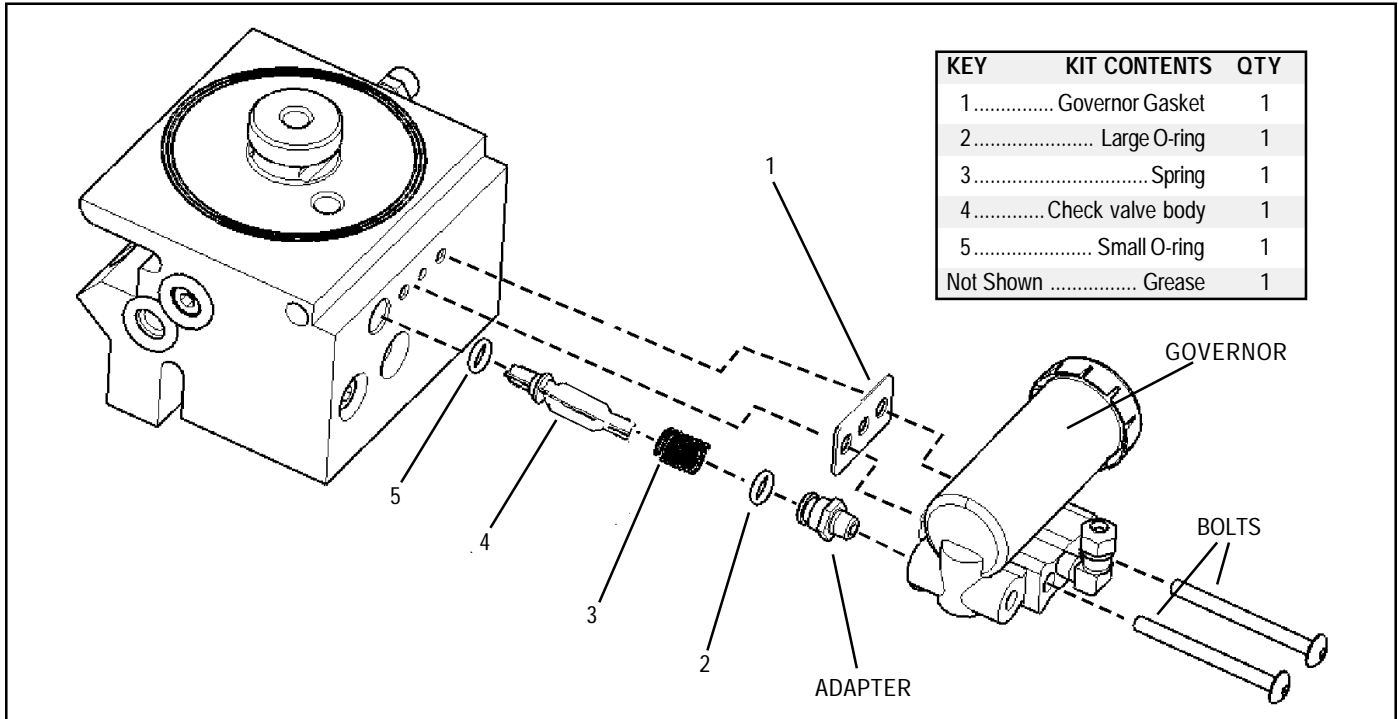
AD-IS DELIVERY CHECK VALVE
